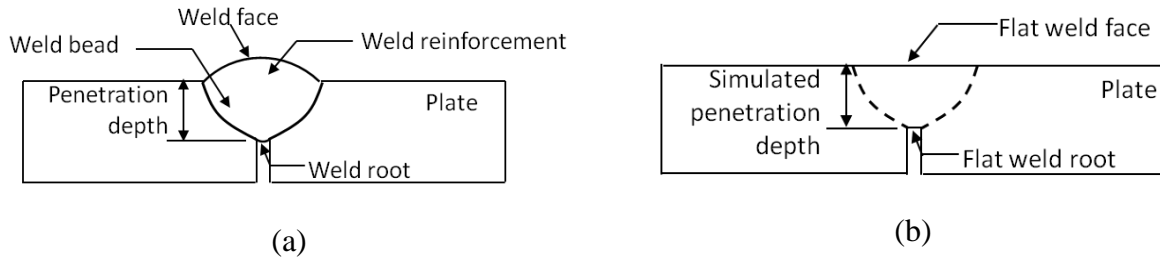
Simulated weld penetration depth: (a) butt joint weld, (b) isolated notch
